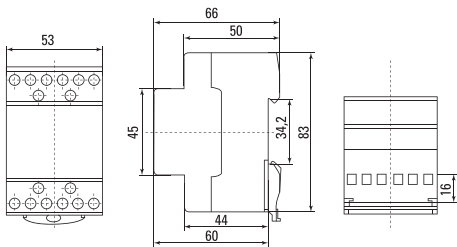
Overall dimensions of Bell transformer VT-230/30VA
